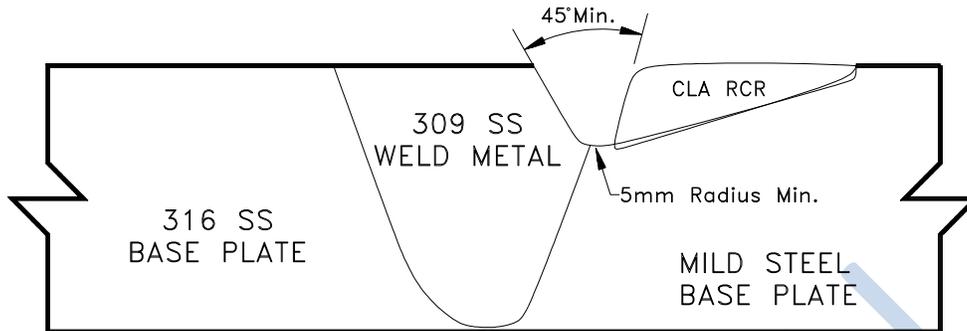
Required Preparation for Stainless Steel Weld Metal
